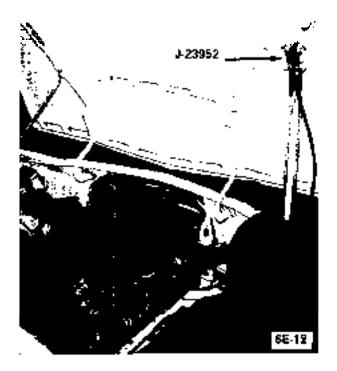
E-12 Throttle Plate Calibrator J-23951 Installed
